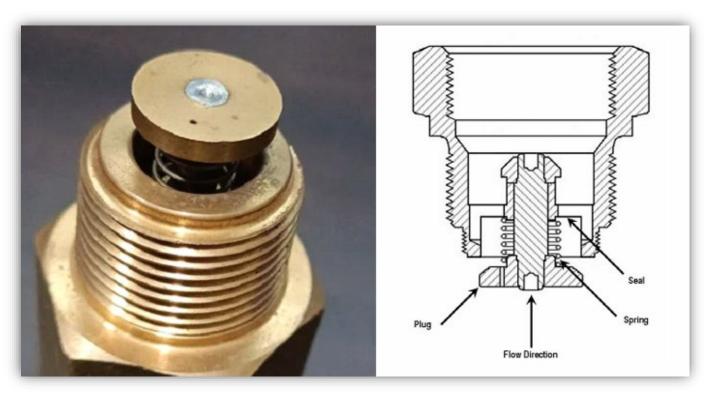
Exemplar excess flow valve and drawing showing spring loaded disc and pressure equalization hole.
